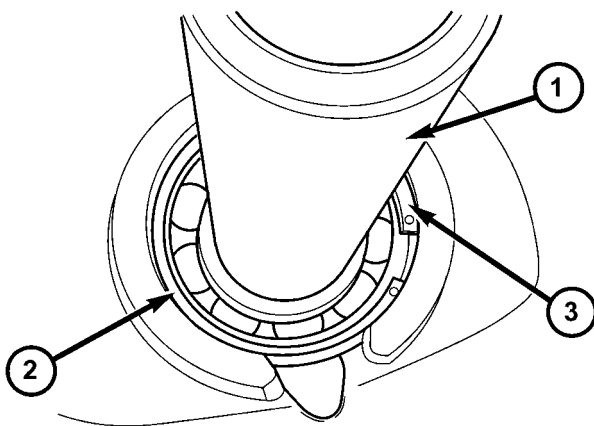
Extension Shaft Bearing Snap Ring Installed
